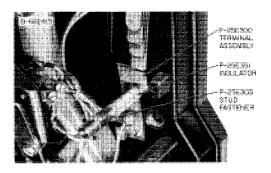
Terminal Assembly, Insulator, and Stud Fastener
